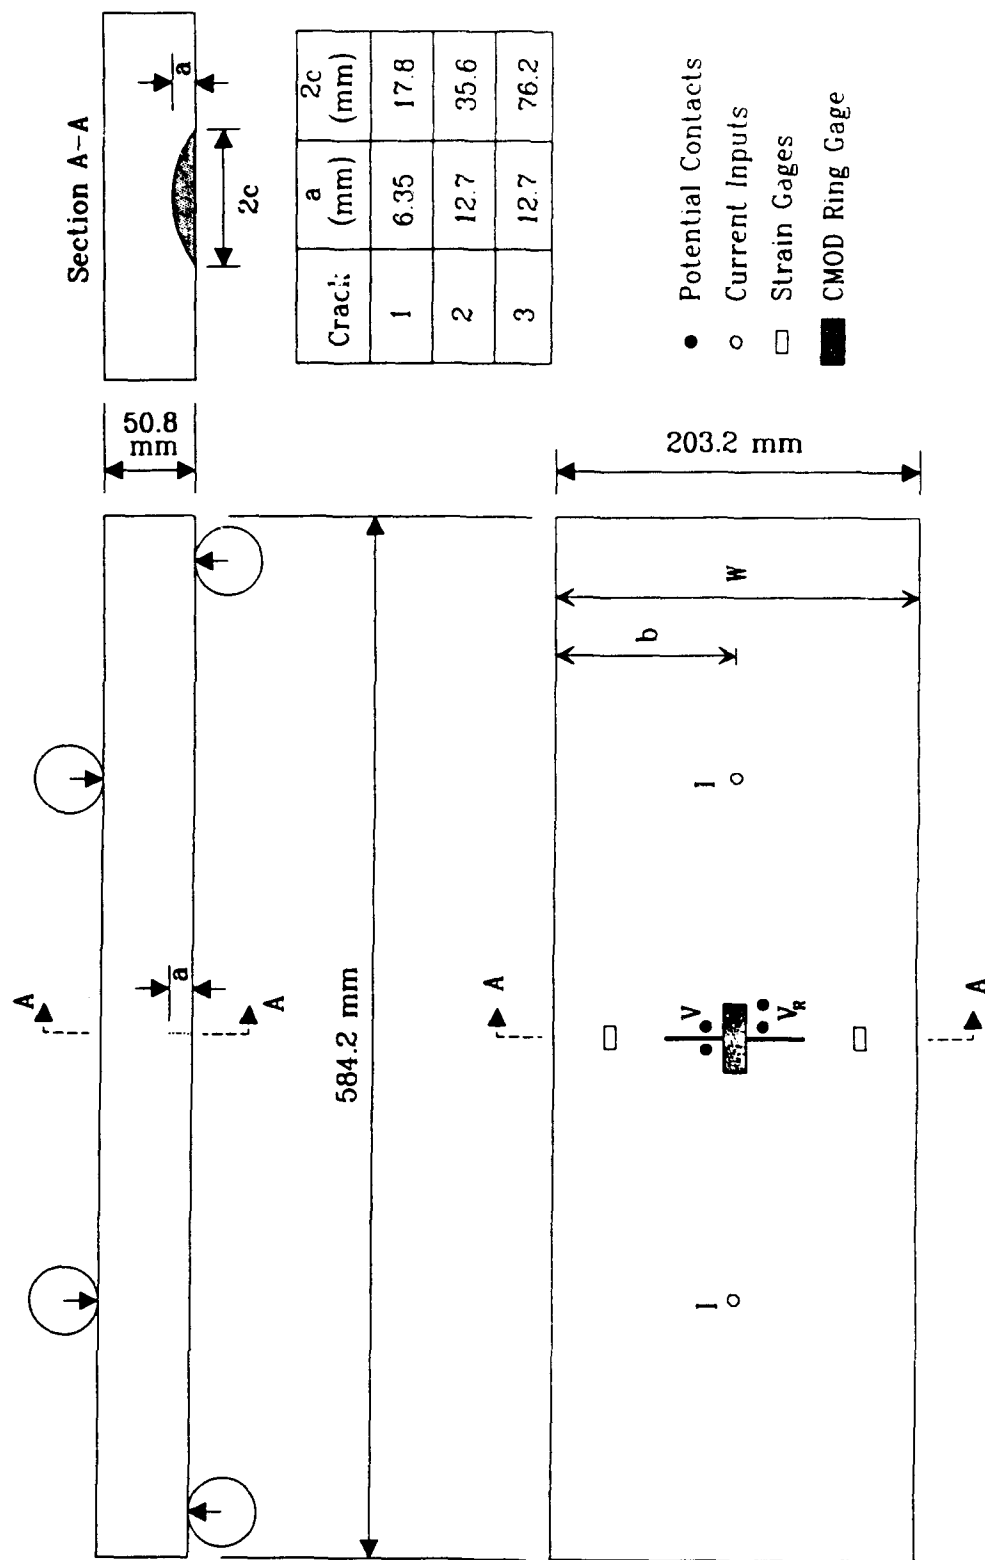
Large plate, surface cracked bend, SC(B), specimen geometry tested in the current study.
